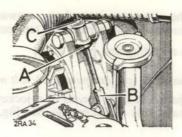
Generator belt adjustment, 24 volt models B—Adjustment strut C-Outer nut on adjustment strut A-Generator
